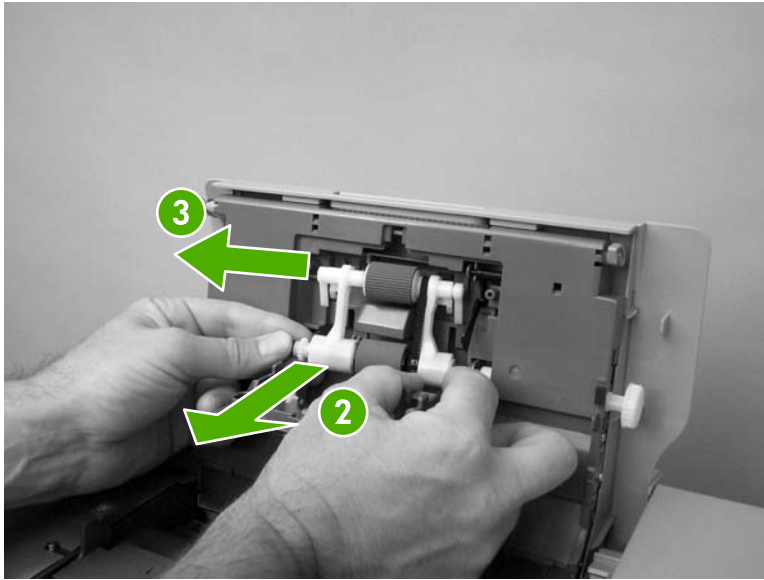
Remove the ADF pickup and feed rollers (3 of 3)
